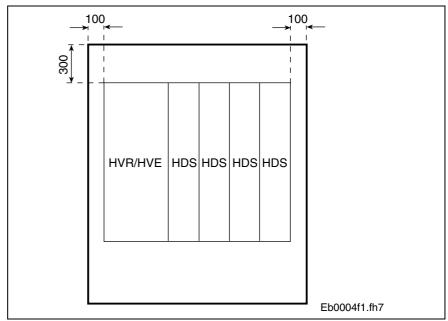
Control cabinet (uncooled, unventilated) with drive package
